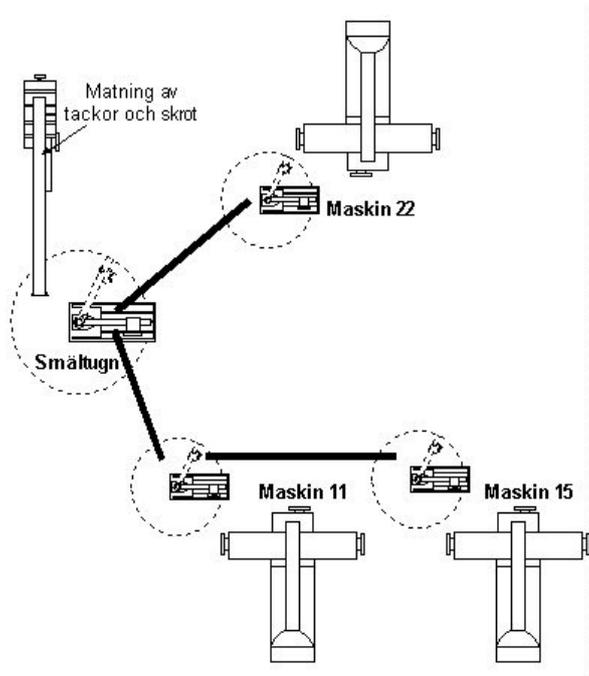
The set up of machines. Components were taken from machine 22 and 11. A HMIAM test was made at the melting furnace.
